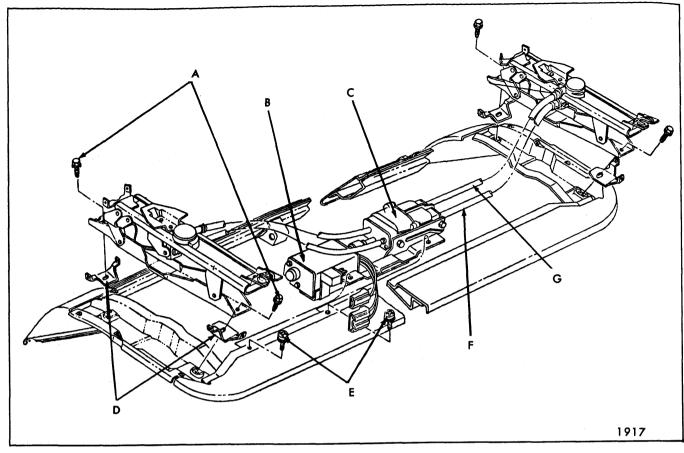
Front Seat Assembly - Four-Way Tilt - "A" Styles
